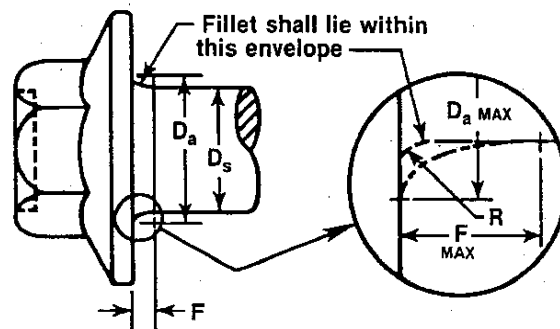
STYLE 'A' FILLET DETAIL FOR LONG SCREWS
